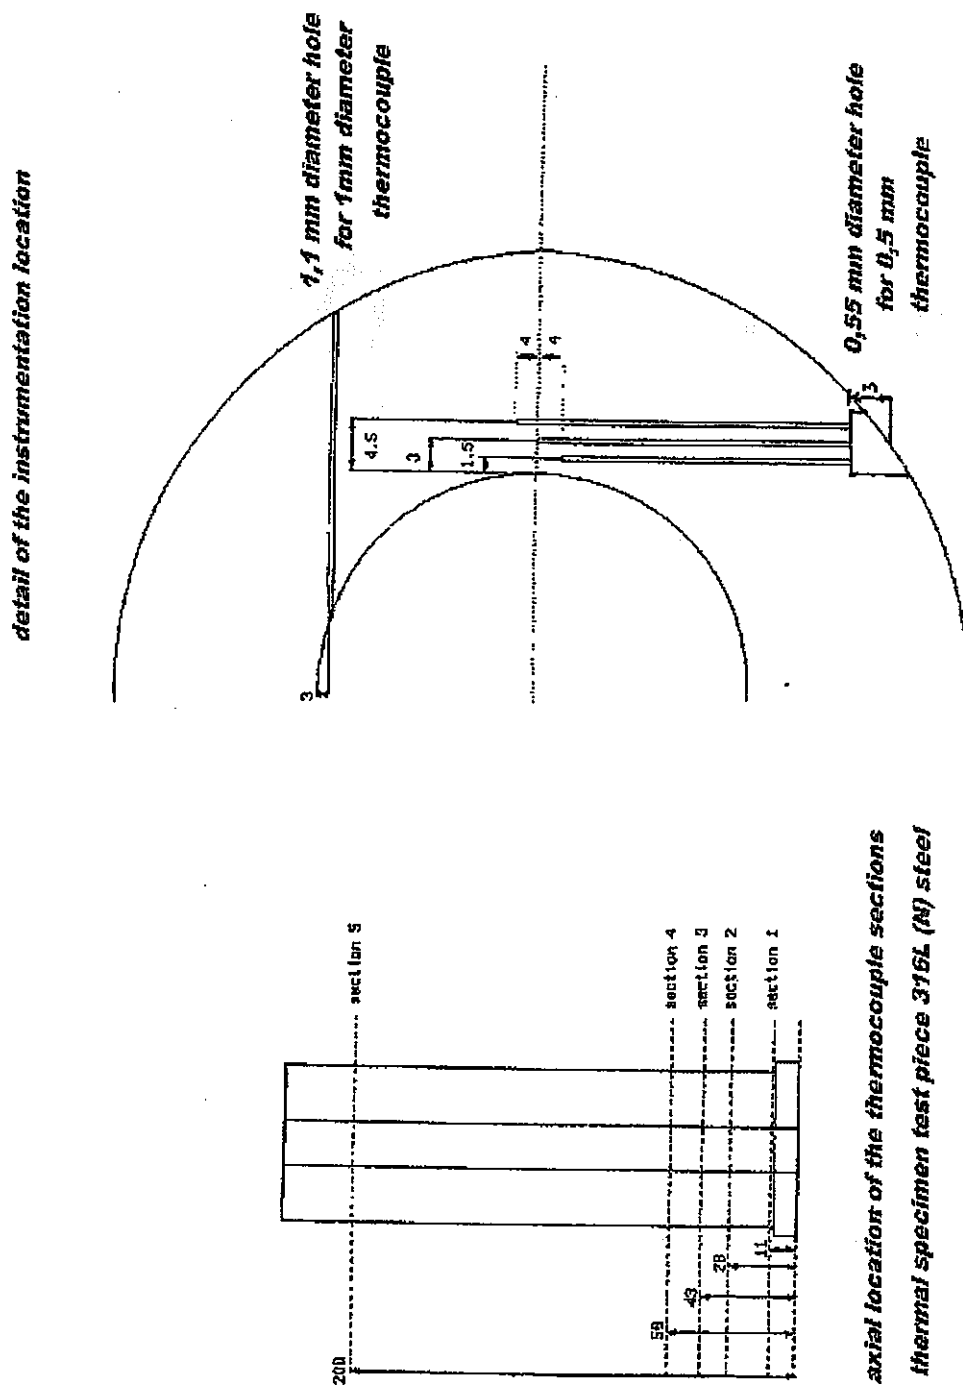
Cylindrical test piece made of 316L(N) steel, locations of thermocouples of the thermal specimen
